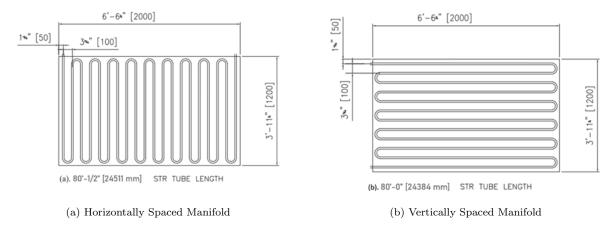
Two-Dimensional Designs of Serpentine Copper Tube Manifold
